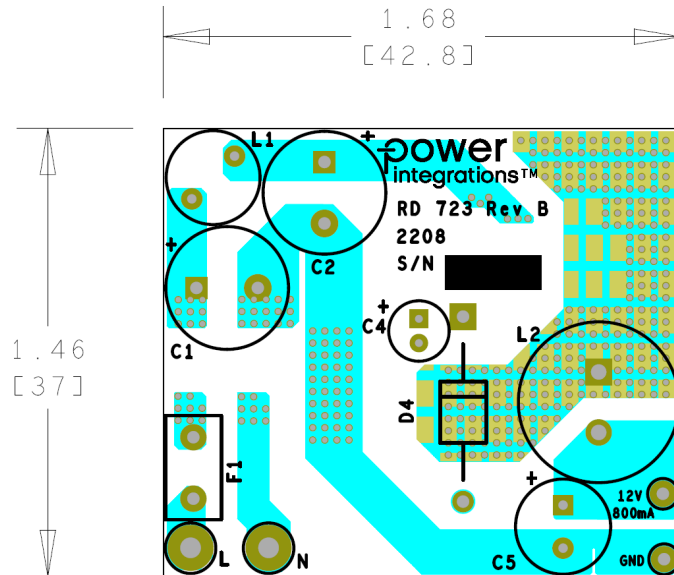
Printed Circuit Layout, Top (1.46" [37 mm] L x 1.68" [42.8 mm] W).
